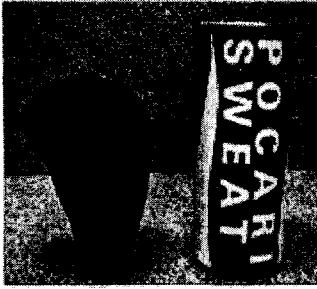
(b) Fabricated parts using VLM-ST(Knob)
